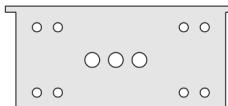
Assembly	2/6/22		5052 Aluminum (.125") plate1.dxf 110 x 50.8 mm
